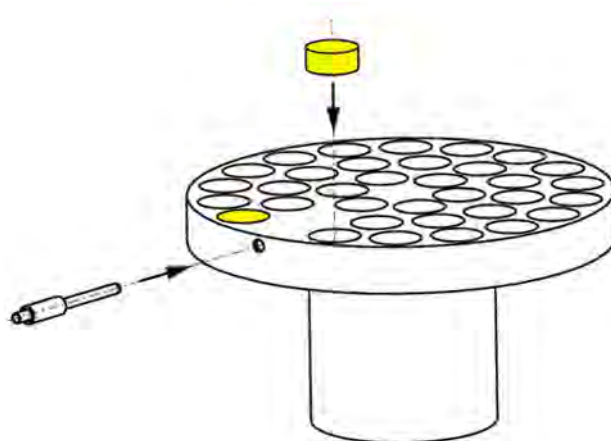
(b) Assembly of thermocouple sheath and  $\varnothing 25$ mm samples into holder
